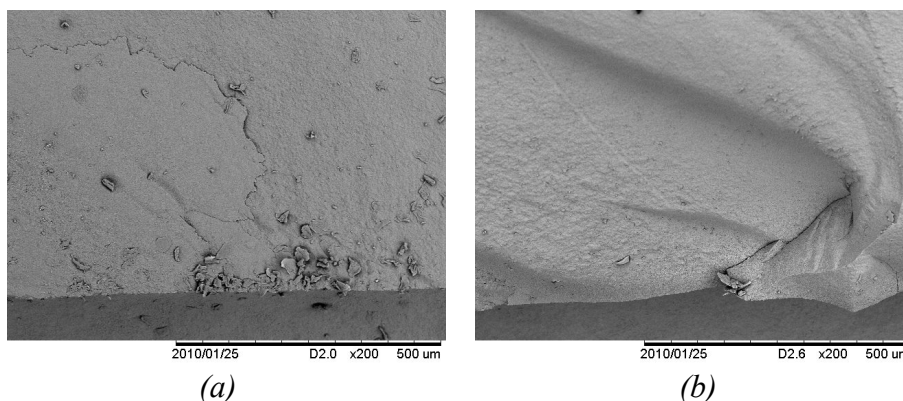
SEM Micrographs of fracture surface for PCBN B tested at (a) 1 mm/min, 20° C and (b) 1 mm/min, 750° C
